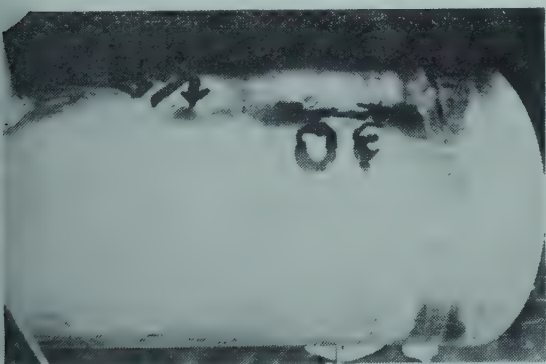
Vessel of Type 304 Stainless Steel, Welded with Type 304 Electrodes Tested as Welded,  $-320$  F, 3000 Ft Lb.
